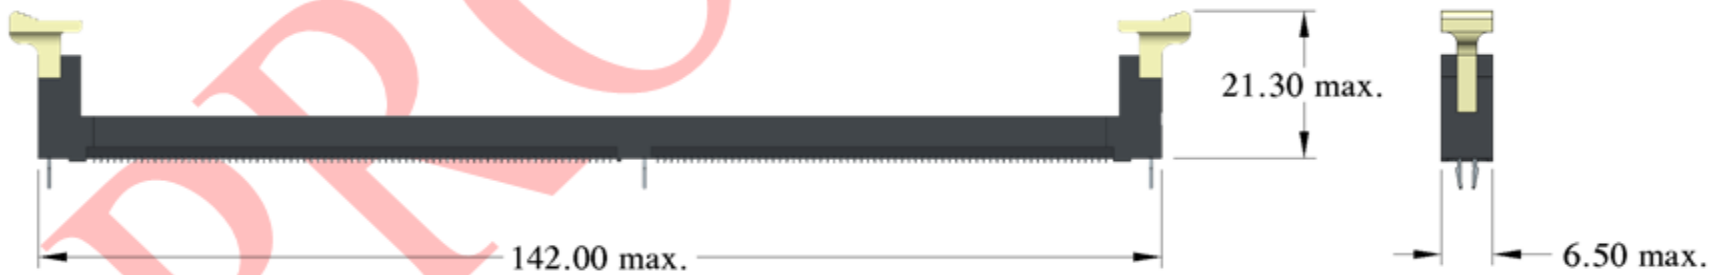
Surface Mount (SMT) Connector Socket Outline
